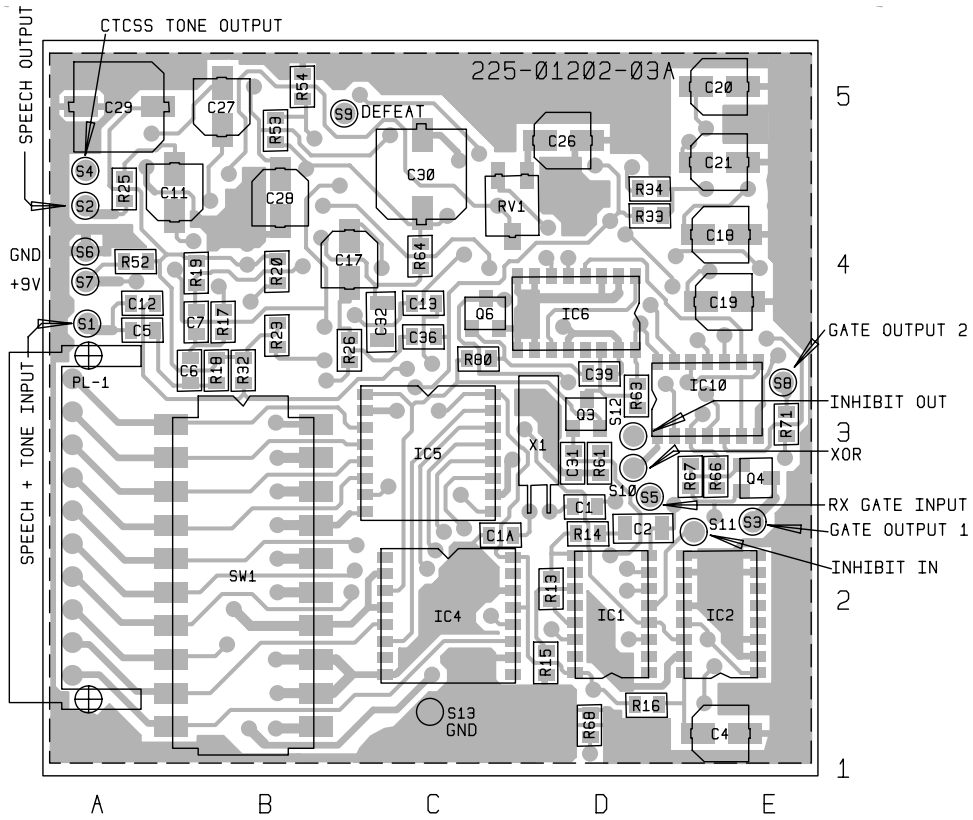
T800-02 PCB Layout - Top Side (IPN 225-01202-03)
